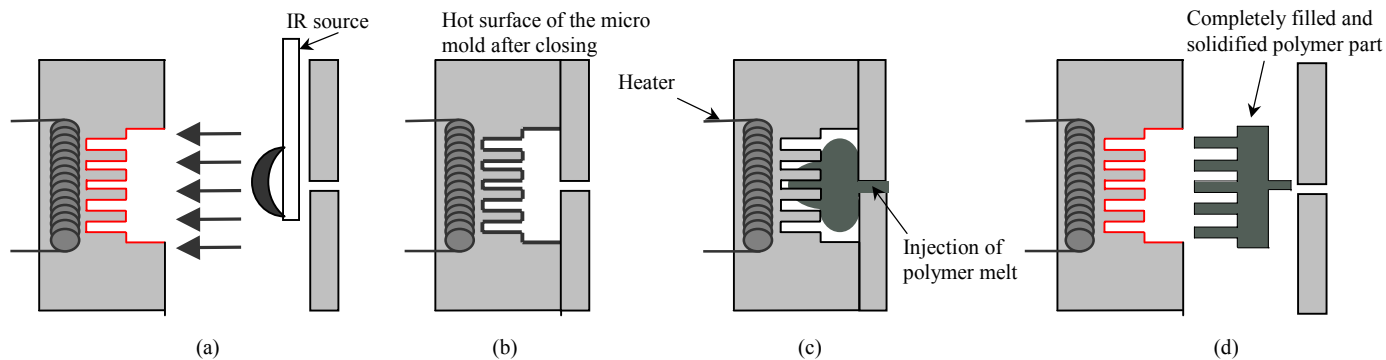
Schematic description of injection molding using rapid thermal process (a) surface heating of the mold disk using IR source; (b) closure of molding block; (c) filling phase of the injected polymer; and (d) complete filling, solidification and ejection of the final polymer part.
